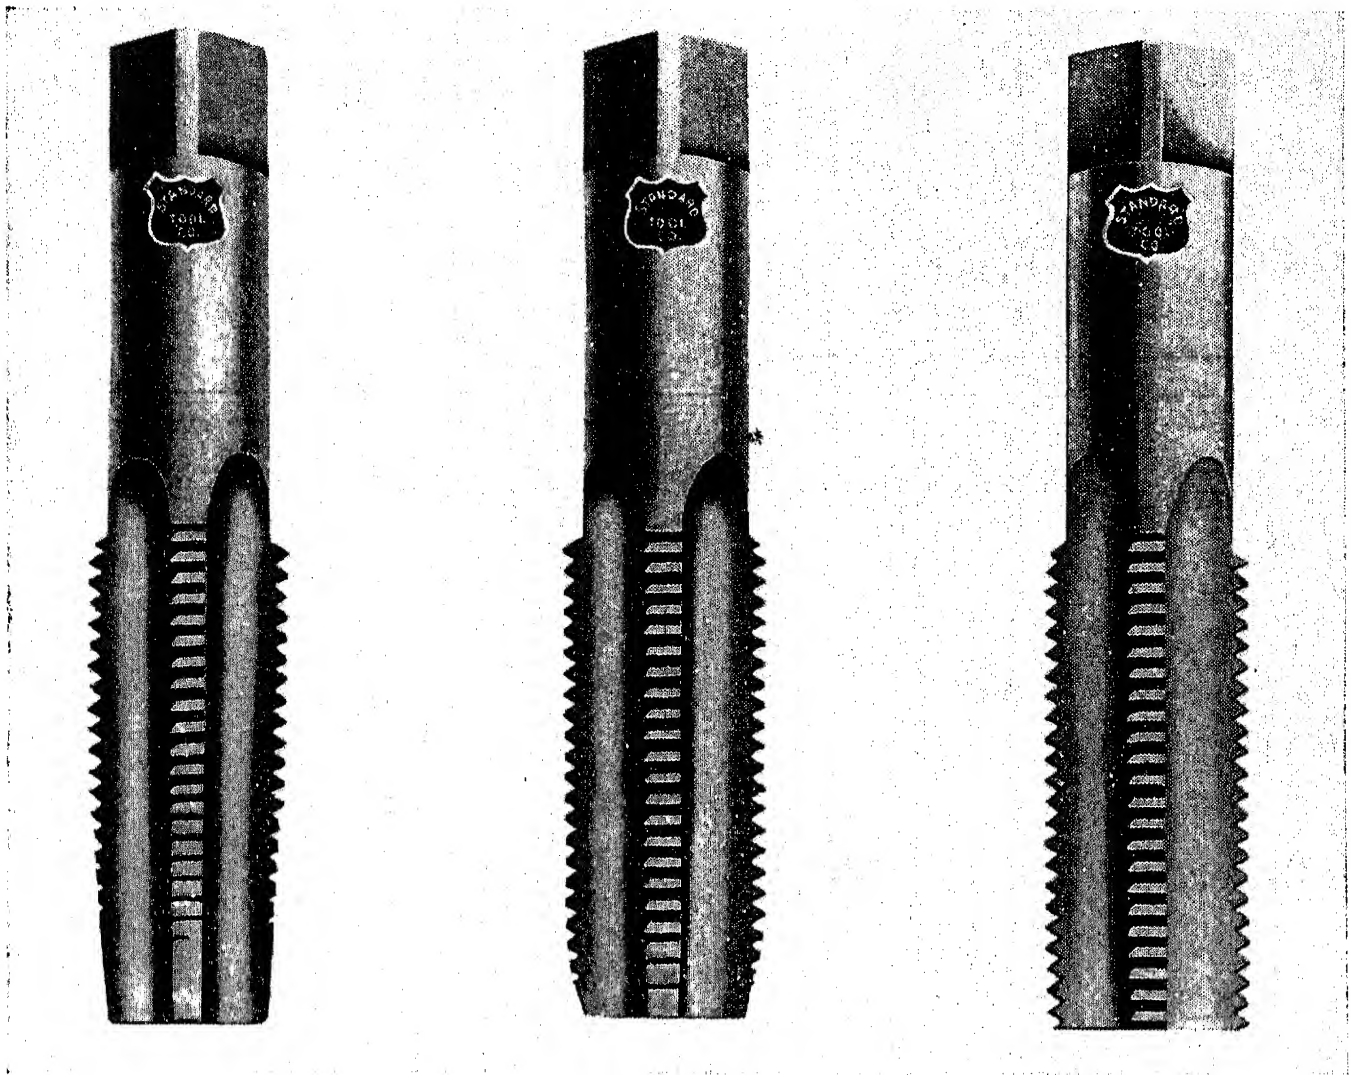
Straight flute hand taps, from left to right; a taper, plug, and bottoming tap. (Courtesy Standard Tool Co.)
